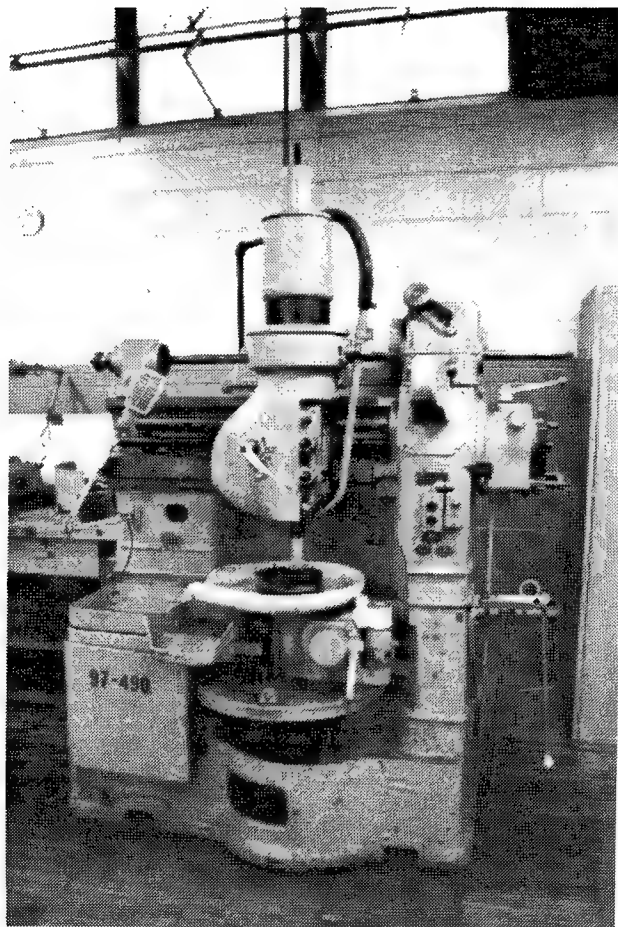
Building 3: Gear Shaper Machine located in the Machine Shop Area of Building 3. This machine was manufactured by Fellows Gear.
